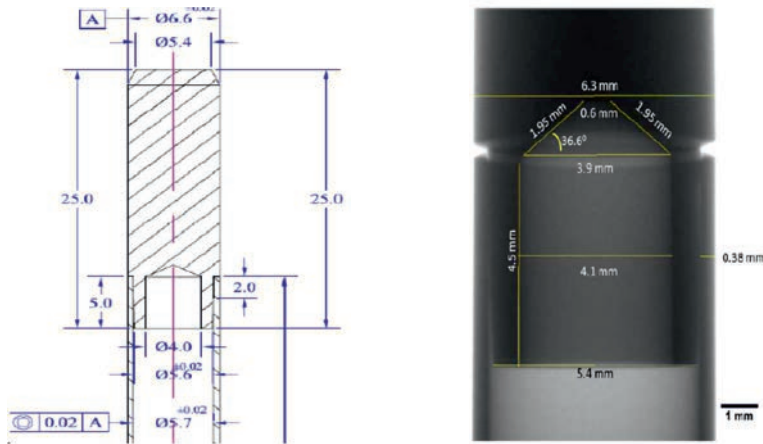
(a). Plug-Tube assembly for TIG/LASER welding (left) and (b). Radiograph of the D9 steel tube and SS316LN plug (right).
